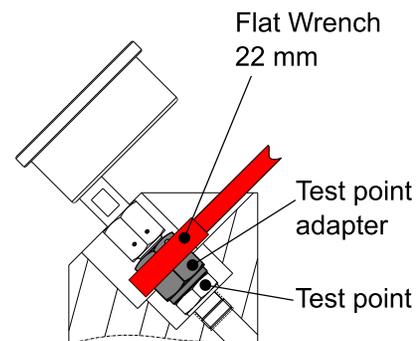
Pressure Gauge and Adapter Installation / Removal
